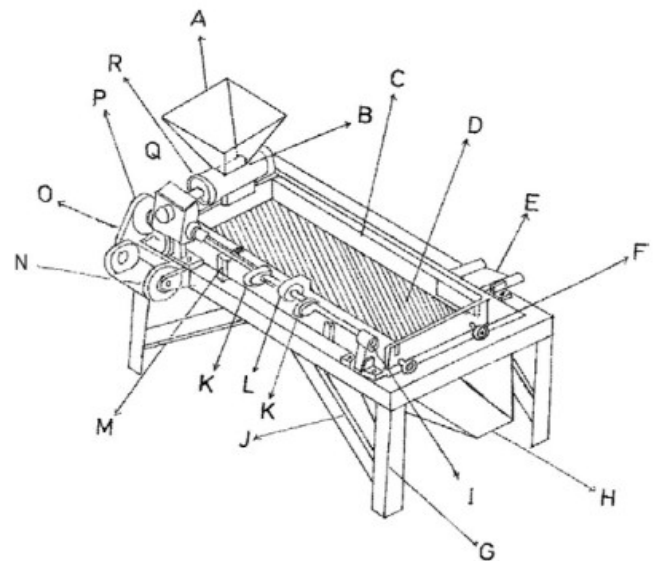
A. Motorised wet sieving machine (LEGEND: A- Hopper, B- Mixing compartment, C- Sieving compartment, D- Mesh, E- trash outlet, F- Roller (4nos), G- Frame, H- Milk outlet, I- Bearing, J- Brace, K- Cam balance, L- Cam, M- Spring holder, N- Electric motor, O- V-belt, P- Pulley, Q- Speed reducing gear, R- Teflon) Source: (Fayose 2008)
